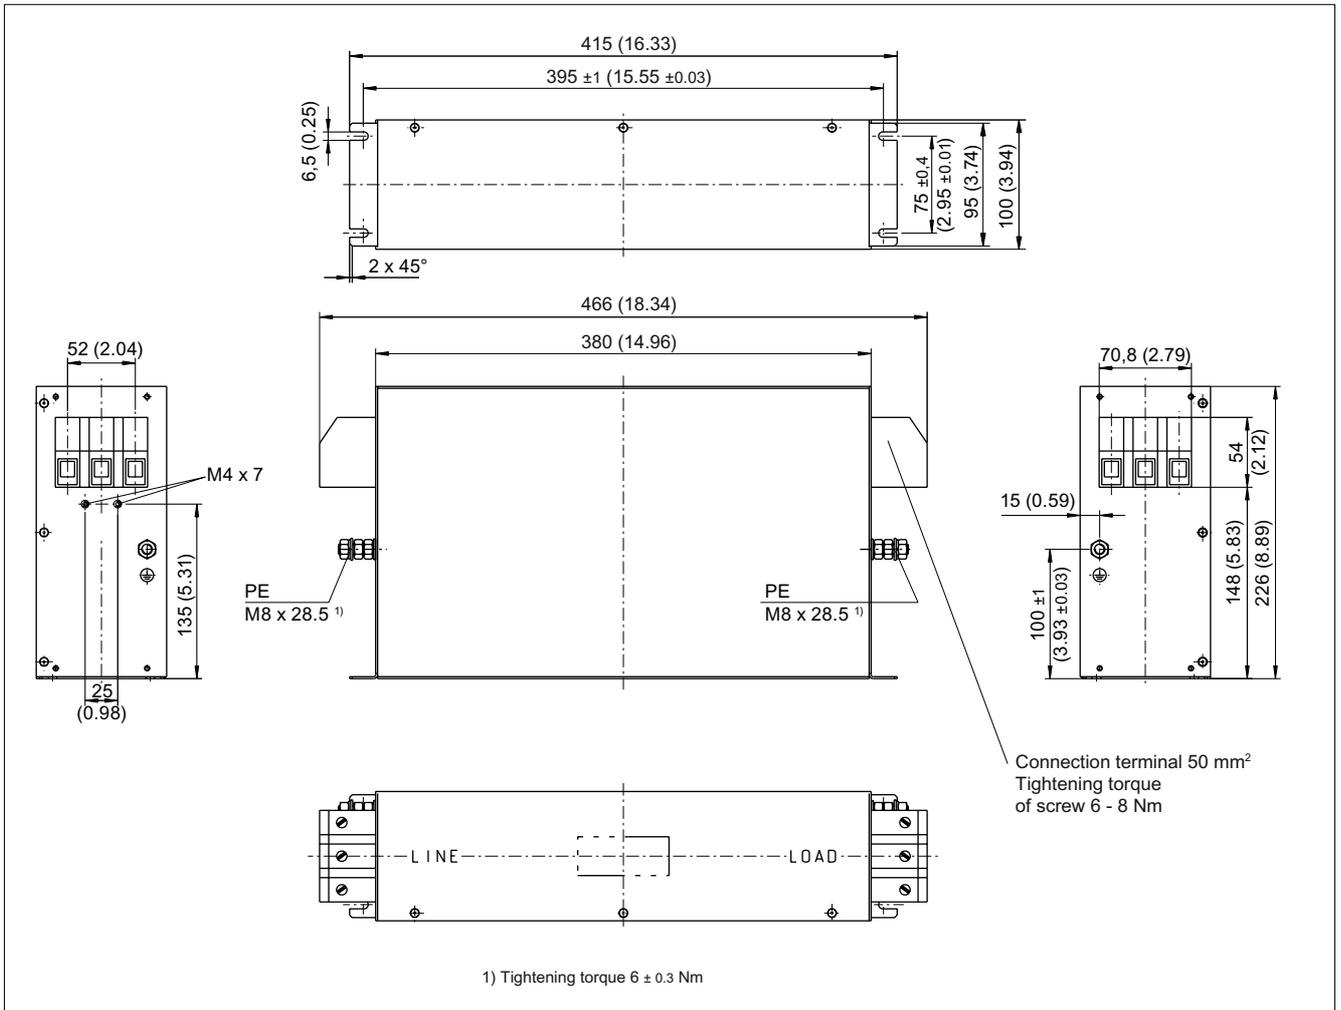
Dimension drawing of Basic Line Filter 55 kW, order number 6SL3000-0BE25-5DAx, all dimensions in mm and (inches)
